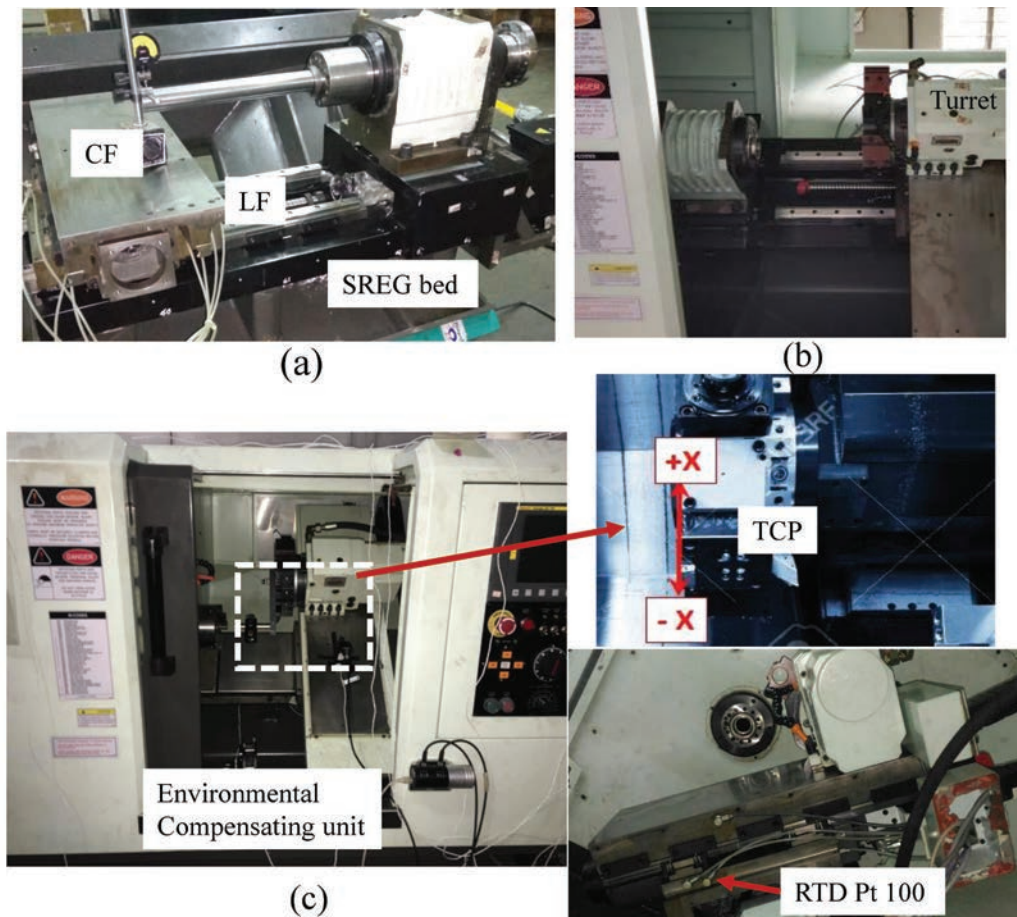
a) Assembly of lathe with SREG bed, b) lathe with SREG bed, and c) experimental setup
